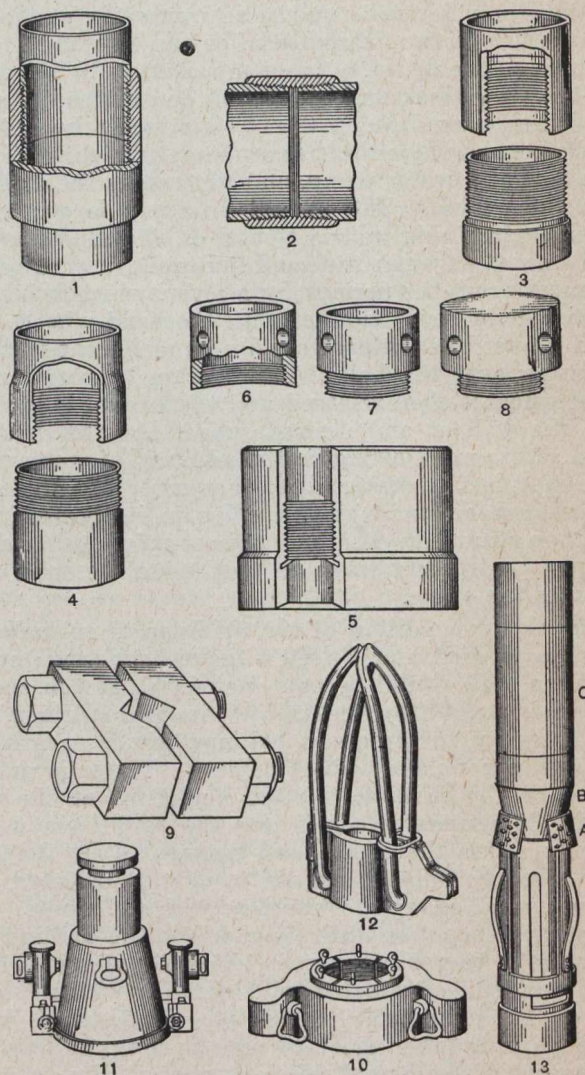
Couplings and casing attachments. 1, Sleeve coupling; 2, Tapered sleeve coupling; 3-4 Sleeve and inserted joint couplings; 5, Shoe; 6-7-8, Drive heads; 9, Drive clamps; 10 Pipe ring; 11 Hydraulic jack; 12, Elevator; 13, Gas packer.
